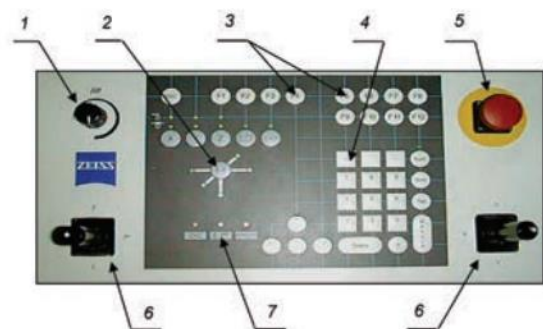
Control panel: 1 - knob for adjusting the pinion travel speed; 2 - spindle selection button; 3 - Function buttons F1 to F12; 4 - numeric keypad for entering data; 5 - safety switch; 6 - two joysticks for manual control of the machine movement of the machine in three axes; 7 - indicators informing about the status of the machine (there are more lights at the top of the desktop)
